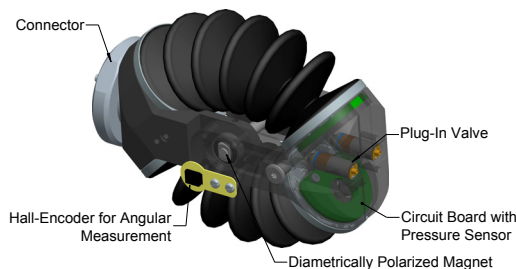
Highly Integrated Flexible Fluidic Drive Module
